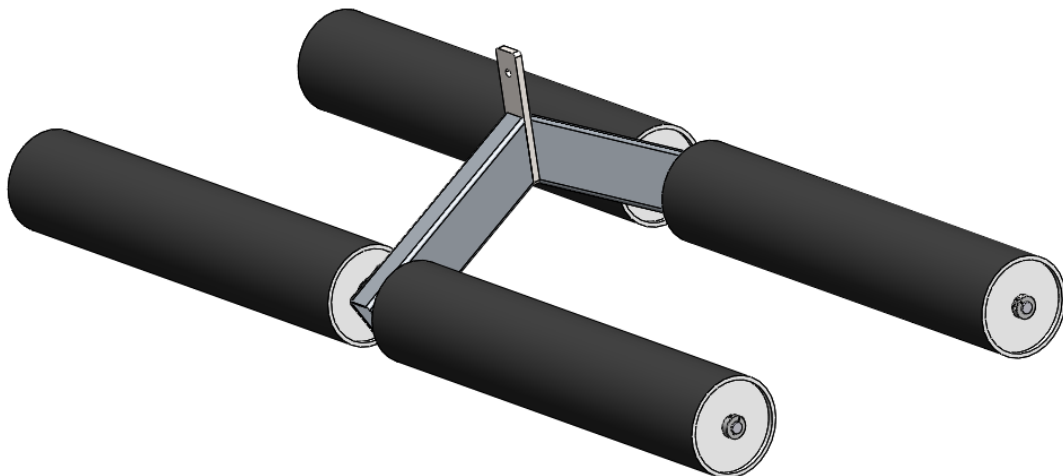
Front side isometric view of the top roller subassembly [9].
